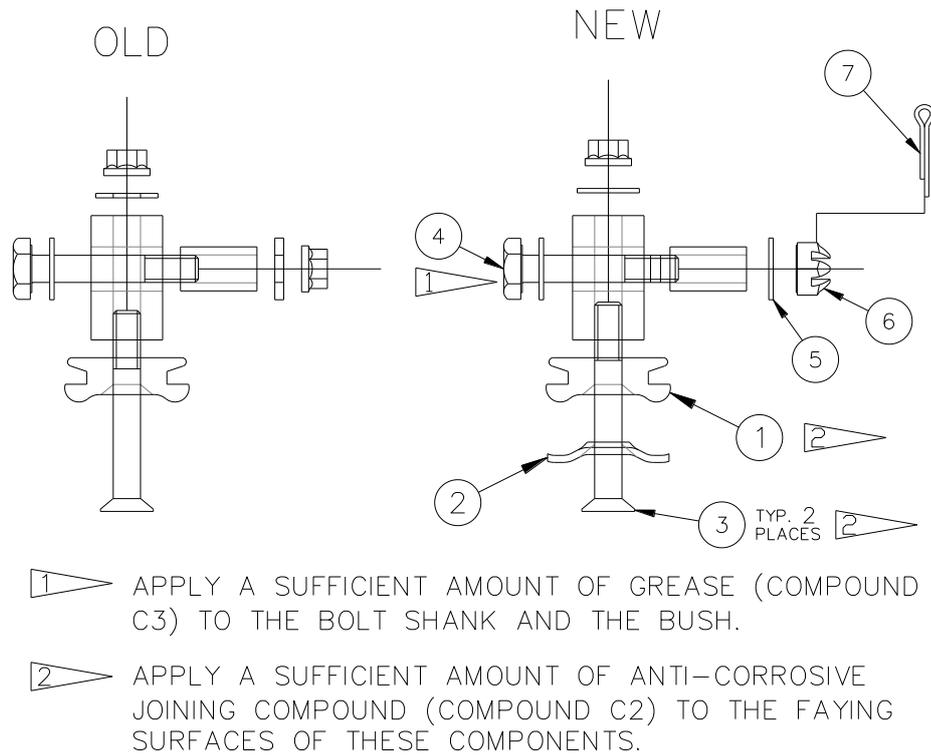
Old (left) and New (right) Forward Cargo Door Guide Assembly.
